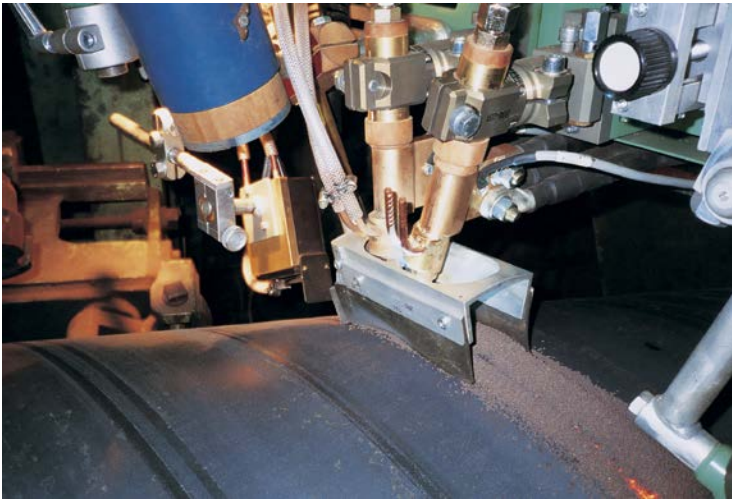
Automated Submerged Arc Weld in Progress
